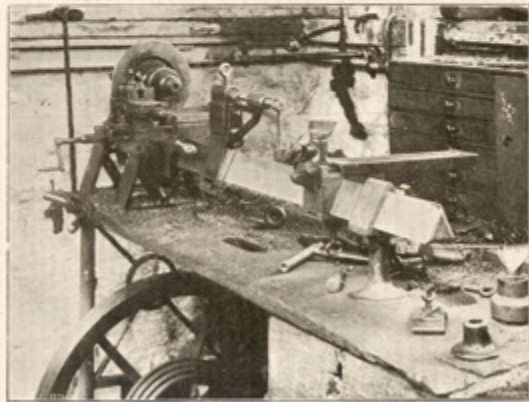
DETAIL OF LATHE SHOWN IN FIG. 2.
